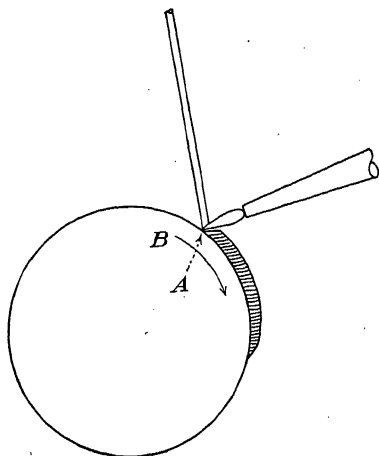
Rolling pipe weld. *B* indicates direction of pipe movement.
